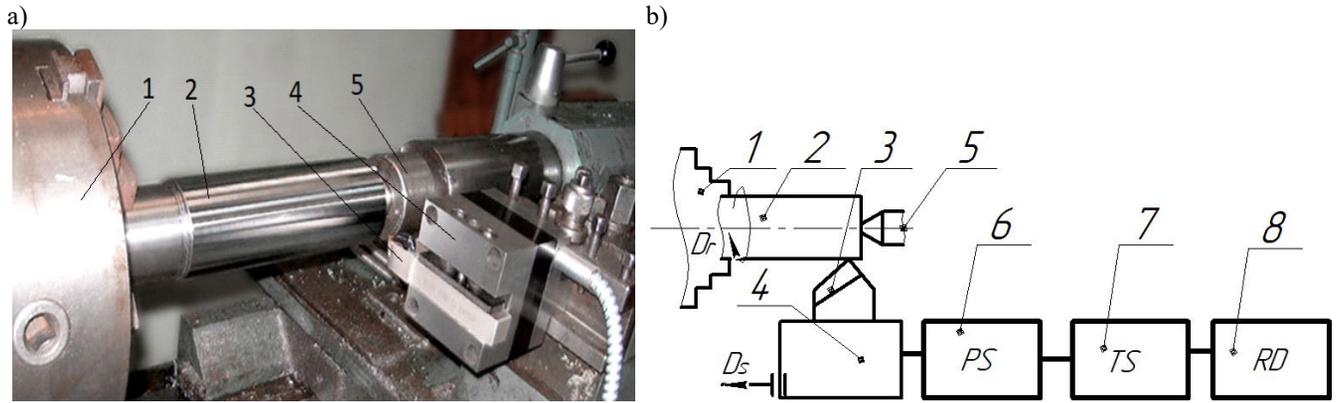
Experimental setup for determining the tangential component of the cutting force while turning on the basis of 16K20 lathe machine tool: a) photography; b) block diagram of the installation; 1 – lathe chuck; 2 – workpiece; 3 – cutter; 4 – support with dynamometer; 5 – back center; 6 – power supply; 7 – tensor station; 8 – the recording device
